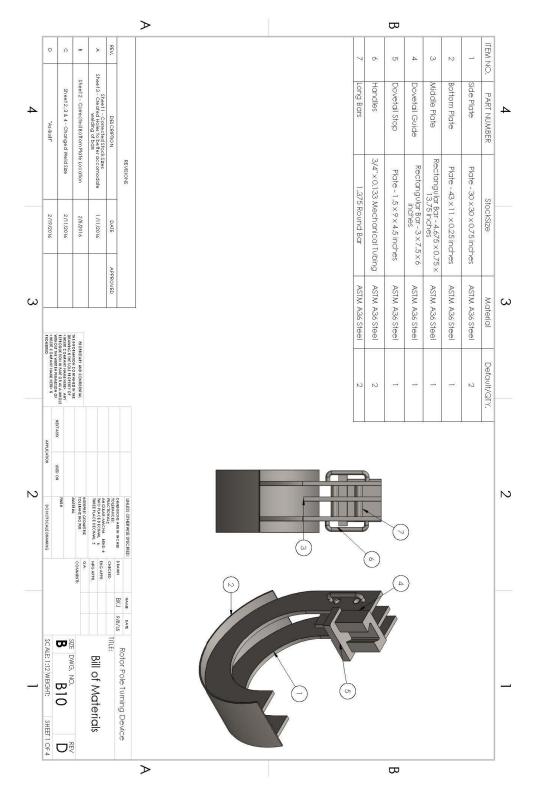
DRAWING OF TURNING DEVICE ASSEMBLY
